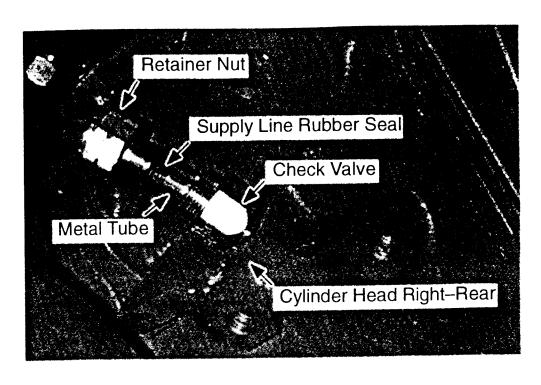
Fuel Supply Fitting (Check Valve) At Cylinder Head
